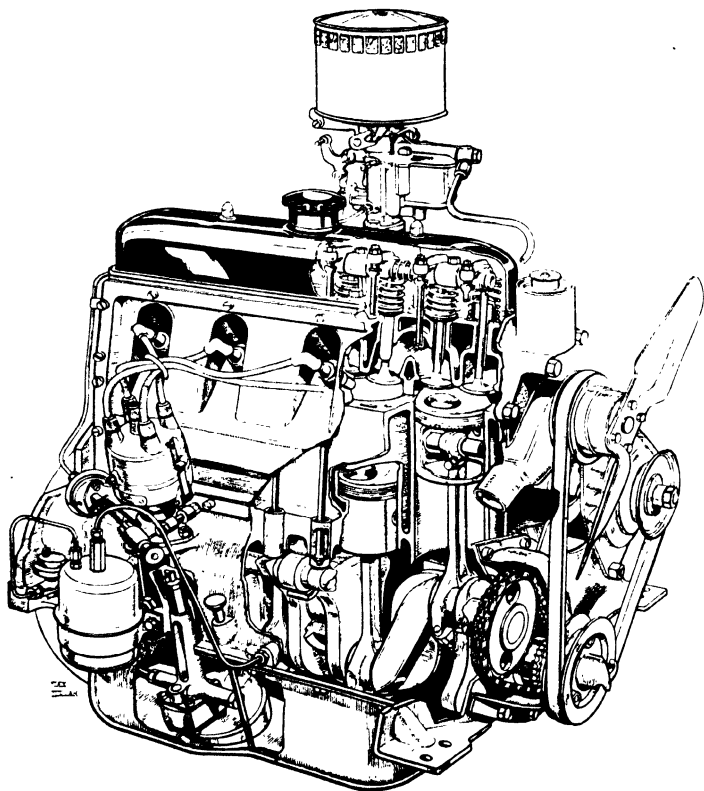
PERSPECTIVE VIEW SHOWING THE LEADING FEATURES OF THE VAUXHALL TWELVE OVERHEAD-VALVE ENGINE
